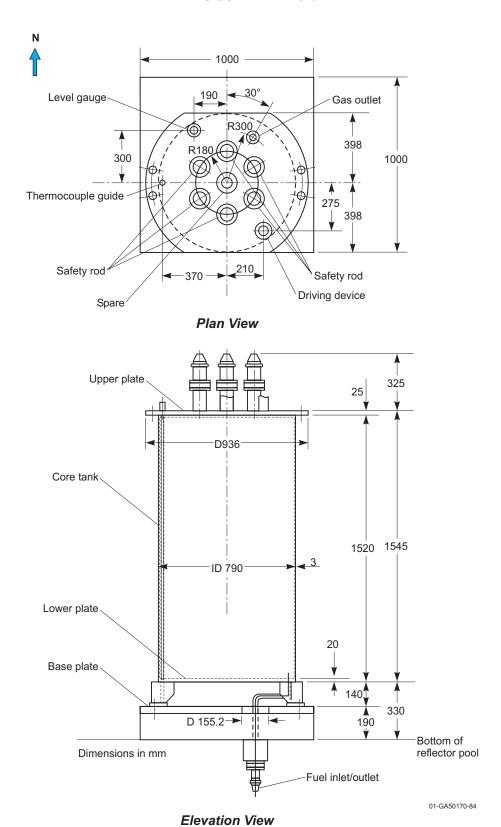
Schematic View of STACY Core Tank. (design dimensions)
